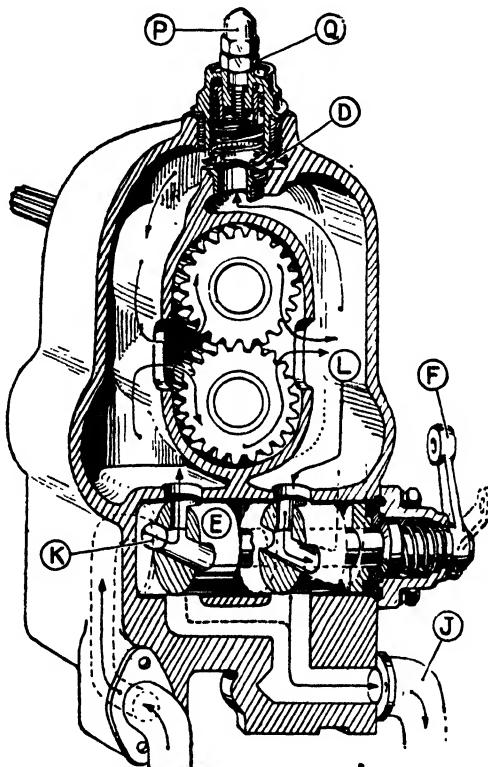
Sectional Diagram of Auxiliary Oil Pump for operating V.P. Airscrew.
